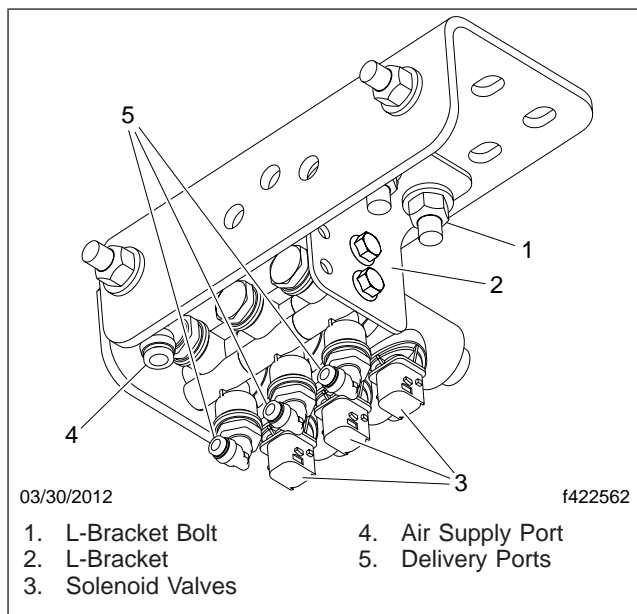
, Auxiliary Air Valve Assembly (AAVA)
